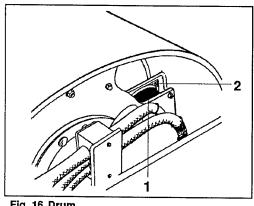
Drum 1 Rubber element 2 Fastening bolts
